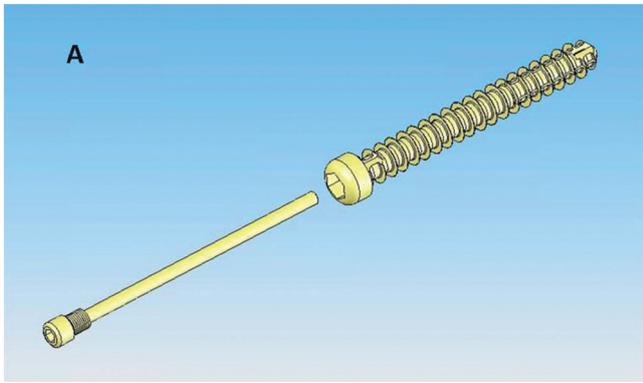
A. The second screw component that allows expansion of the screw tip and locks of the main piece after the screw has been expanded
